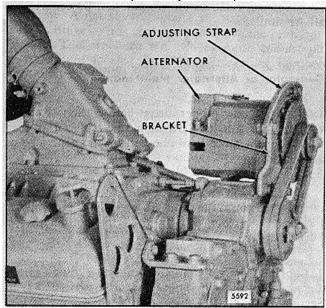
Typical Hinge-Mounted Alternator (Belt- Driven)
